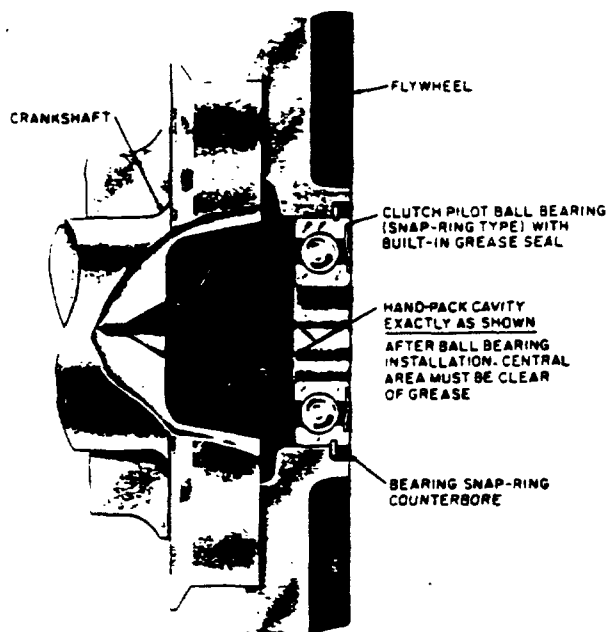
Cut-away View of Clutch Pilot Bearing Grease Reservoir Correctly Packed
